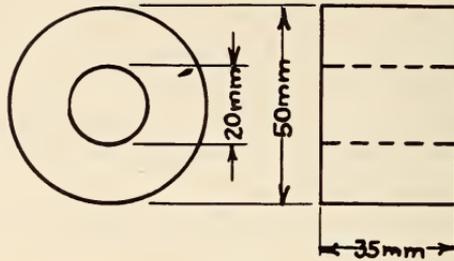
Recommended dimensions for camera bobbins and raw film core.
